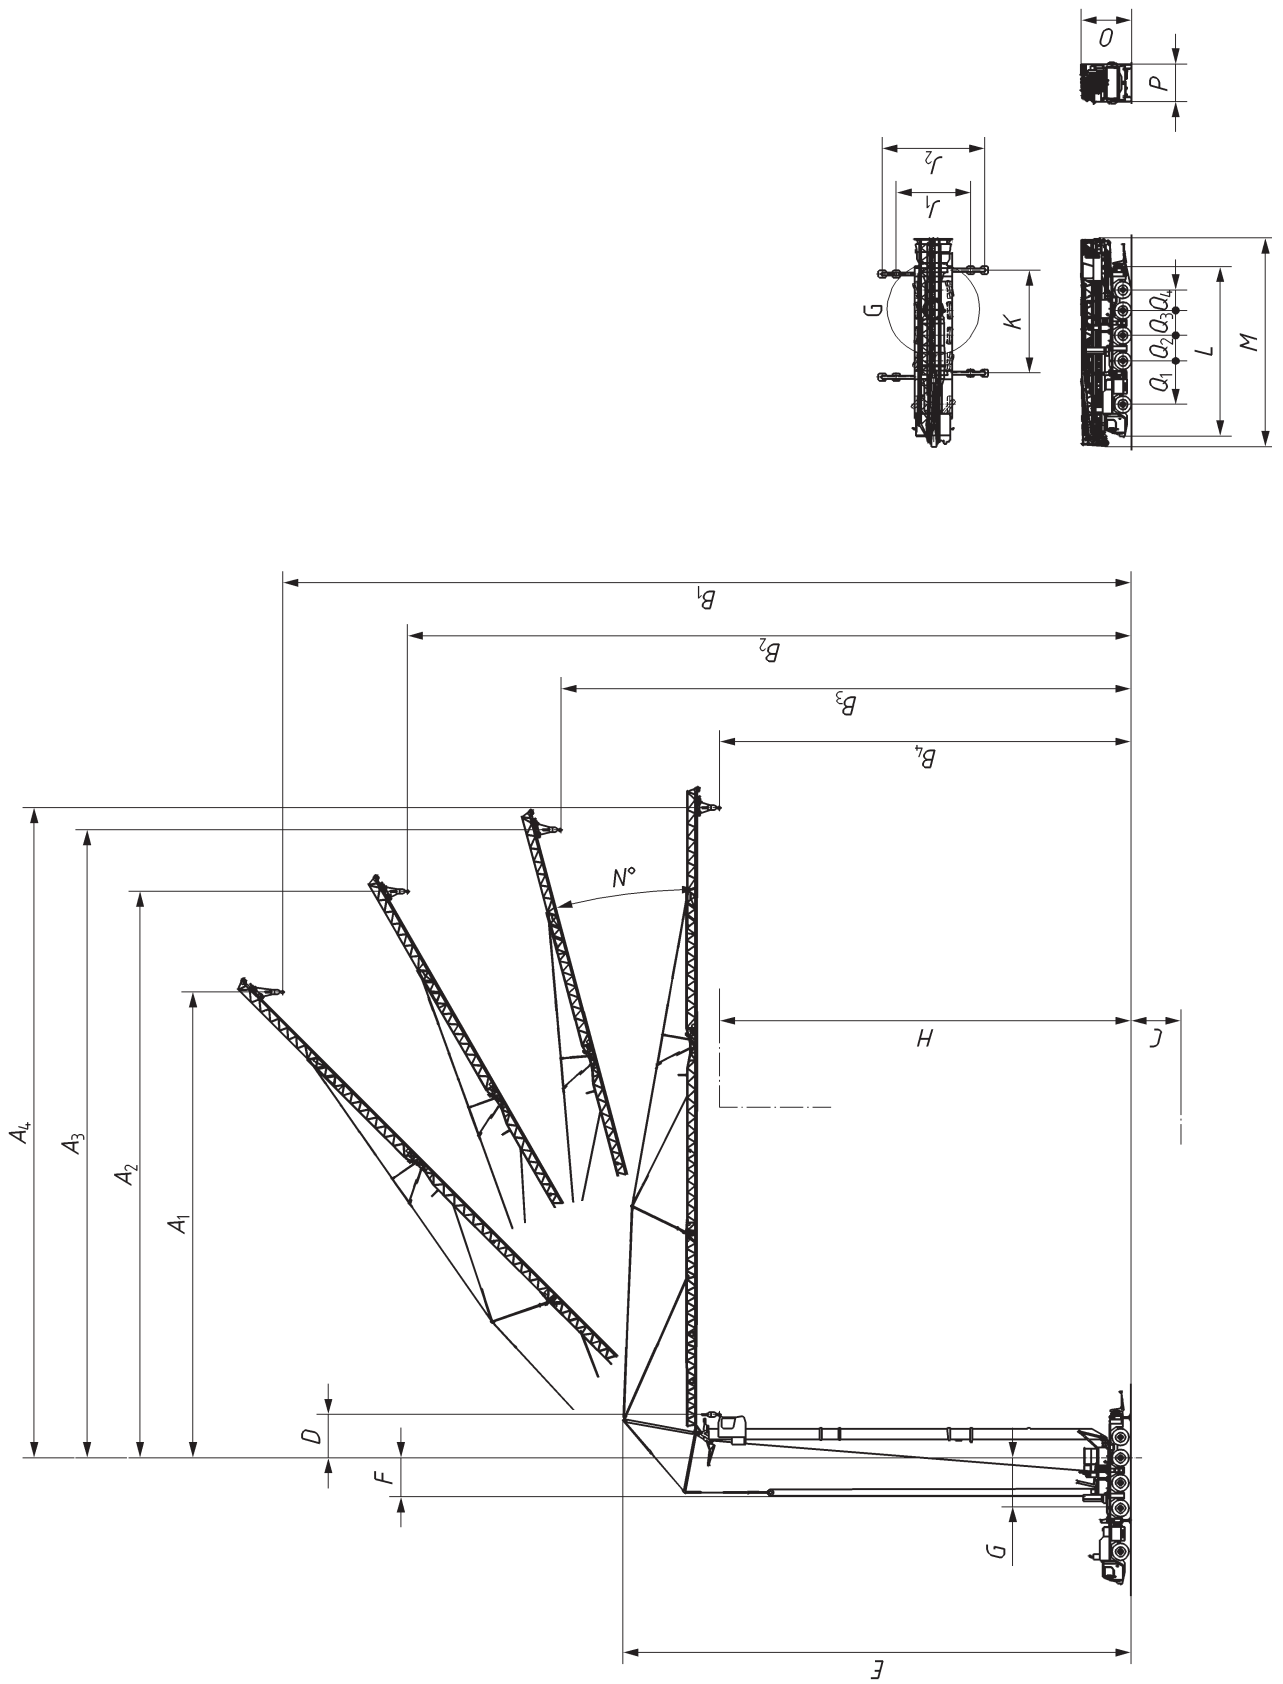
Tower cranes with luffing jib — Examples of dimensions to be provided by the manufacturer, as applicable
